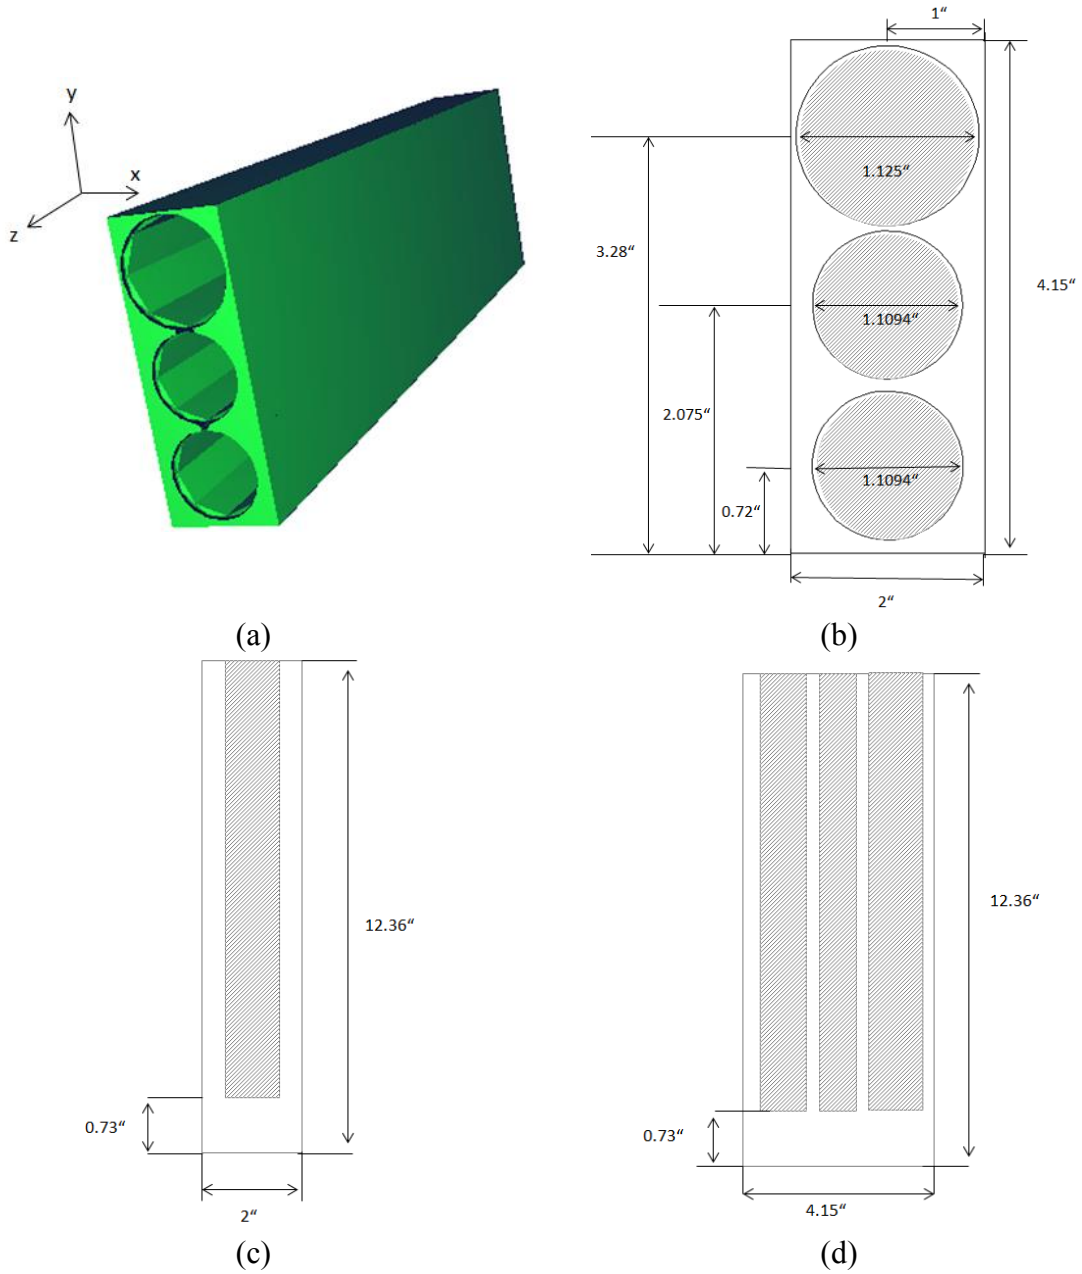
Drawings for Al block machining: (a) 3-D view, (b) x-y view, (c) x-z view and (d) y-z view
